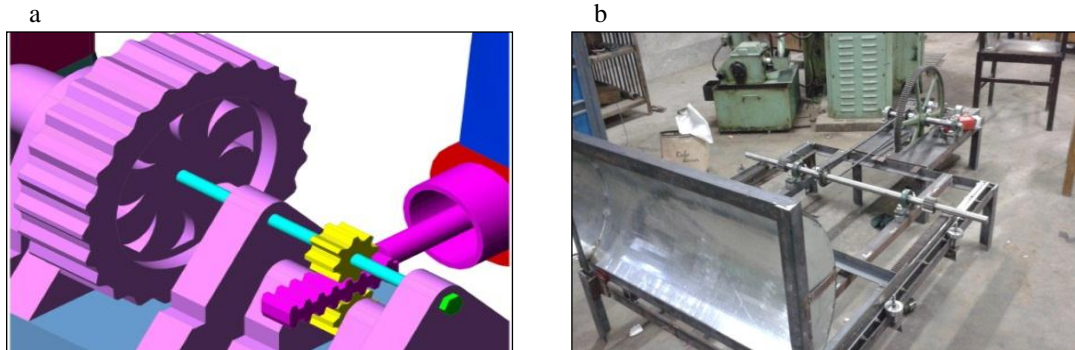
(a) Gear Mechanism; (b) Experimental Setup.
